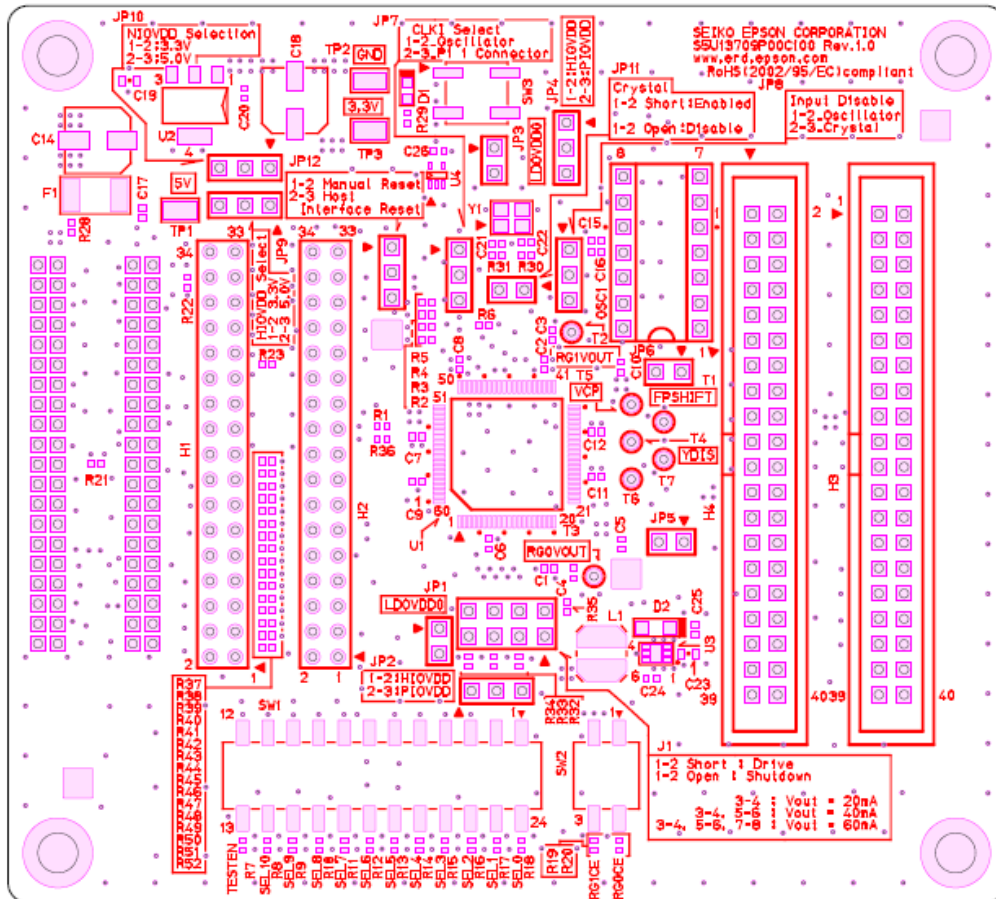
S5U13709P00C100 Board Layout – Parts Side
